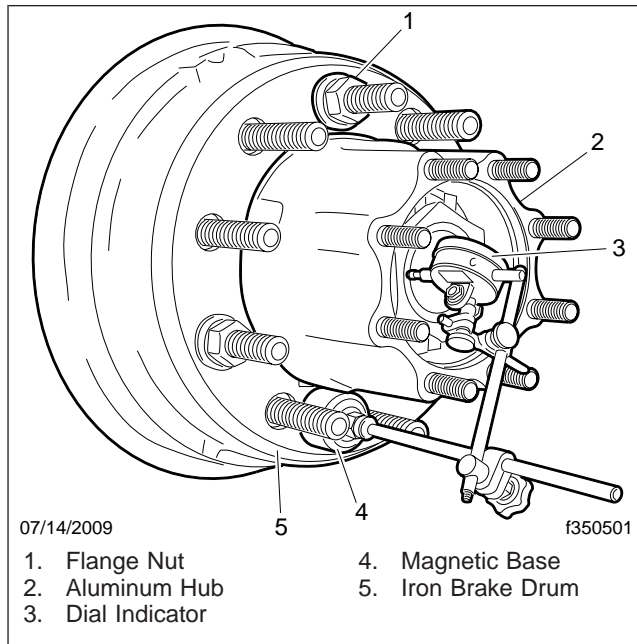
, Dial Indicator Setup, Aluminum Hub with Iron Brake Drum
